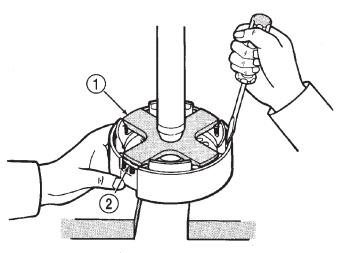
Removing Clutch Drum Thrust Washer And Race
